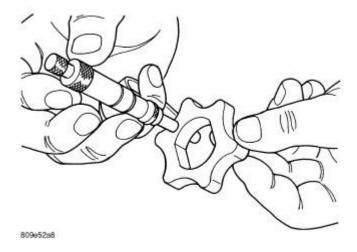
MEASURING INNER ROTOR THICKNESS Courtesy of CHRYSLER LLC
